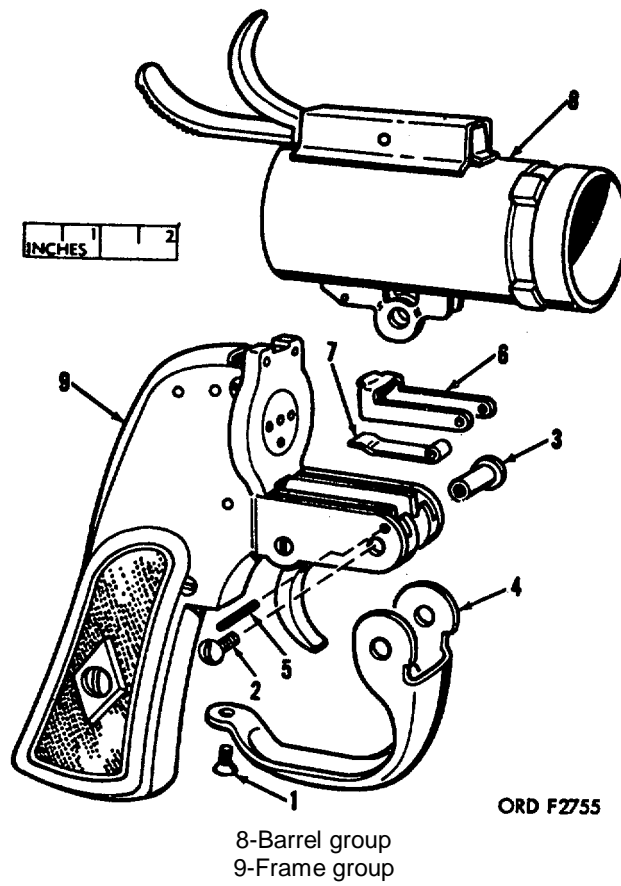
Pyrotechnic pistol AN-M8-exploded view.
